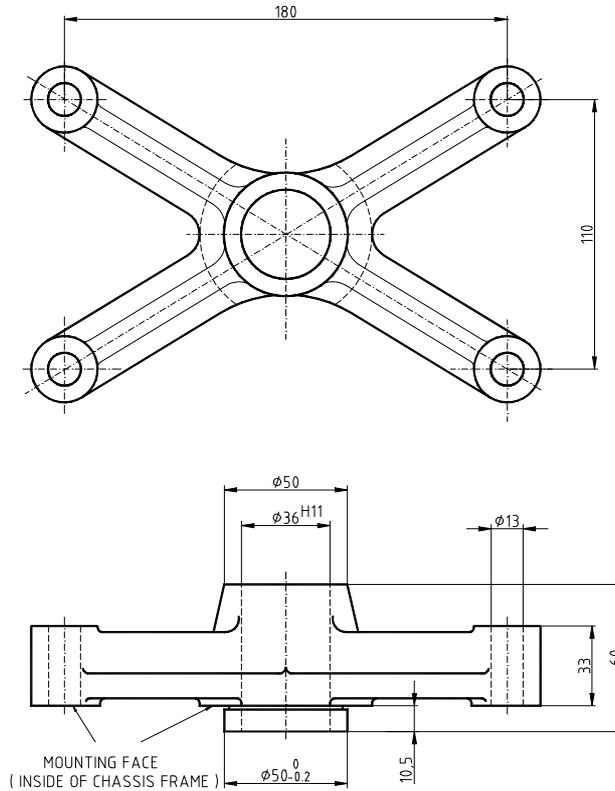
Center mounting support parts number: A 425 551 12 21
